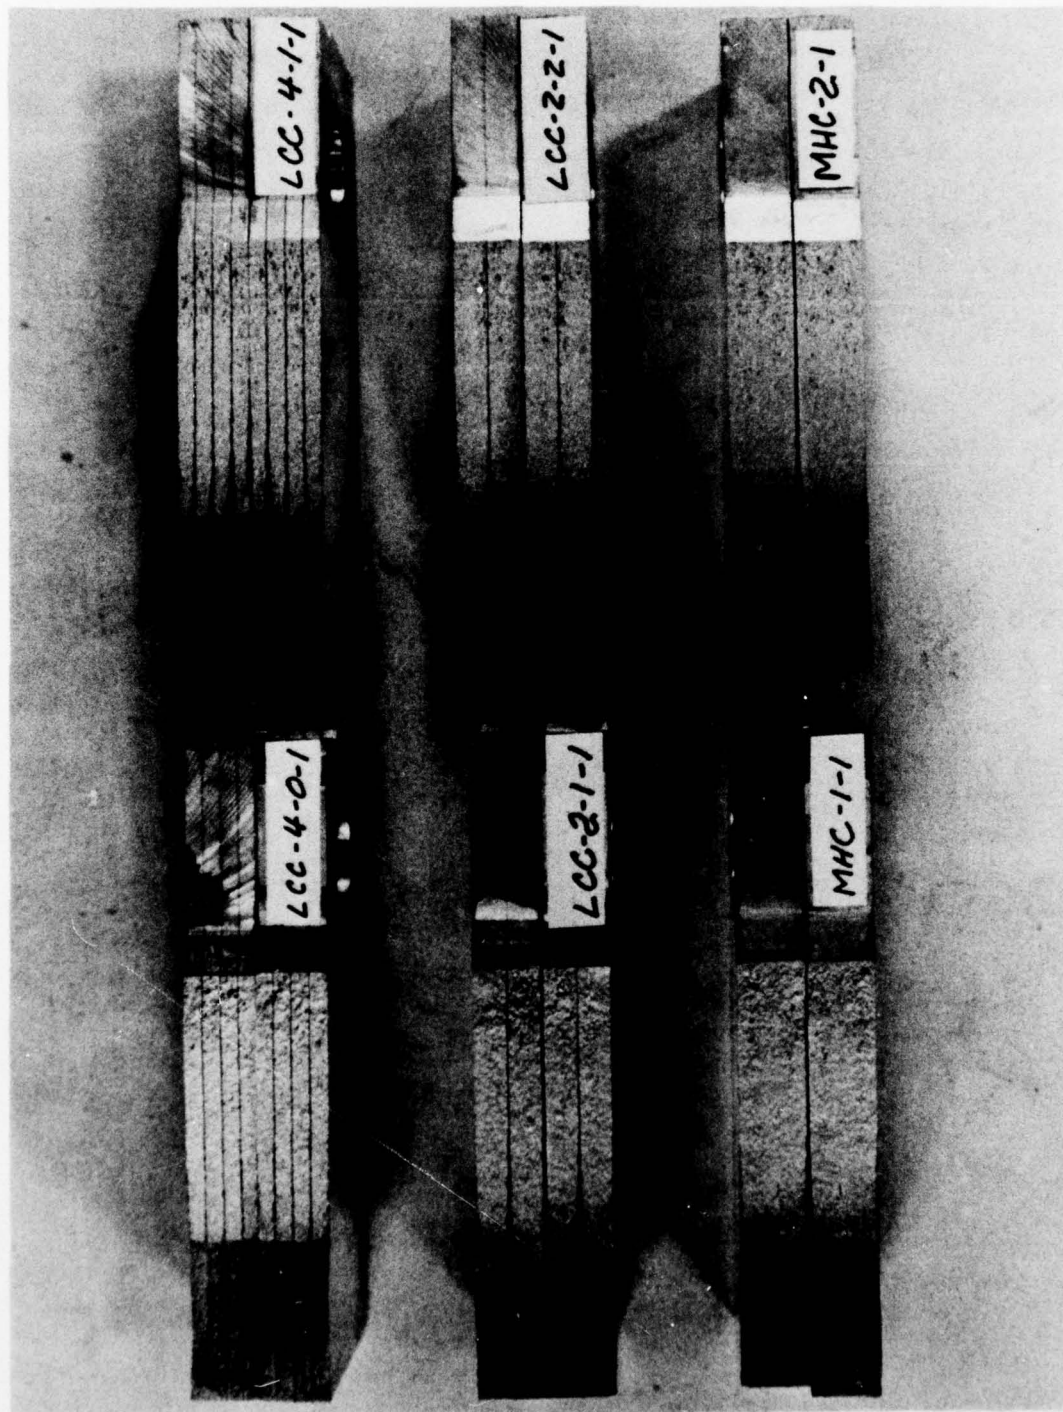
Fracture Surfaces of Compact Tension Fatigue Test Specimens made from FDL Material (Table 2).
